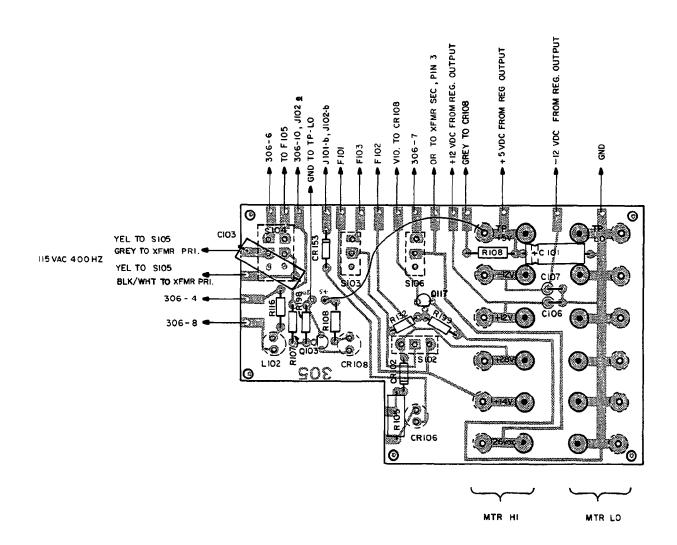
P.C. BOARD ASSEMBLY, BOARD 305, DRAWING (Dwg. 300-05989-0000 Rev. 0)
